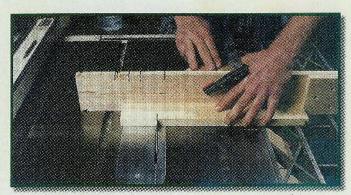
Narrow pieces like the stretchers cannot be safely cut to length using the rip fence as a guide. Here, they are shown being cut to length using the miter gauge with an extended auxiliary fence and stop block.
